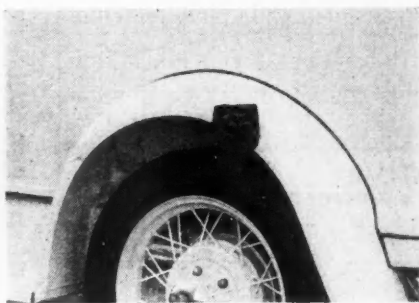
Tears in fenders are repaired by cutting out a V and welding a patch
